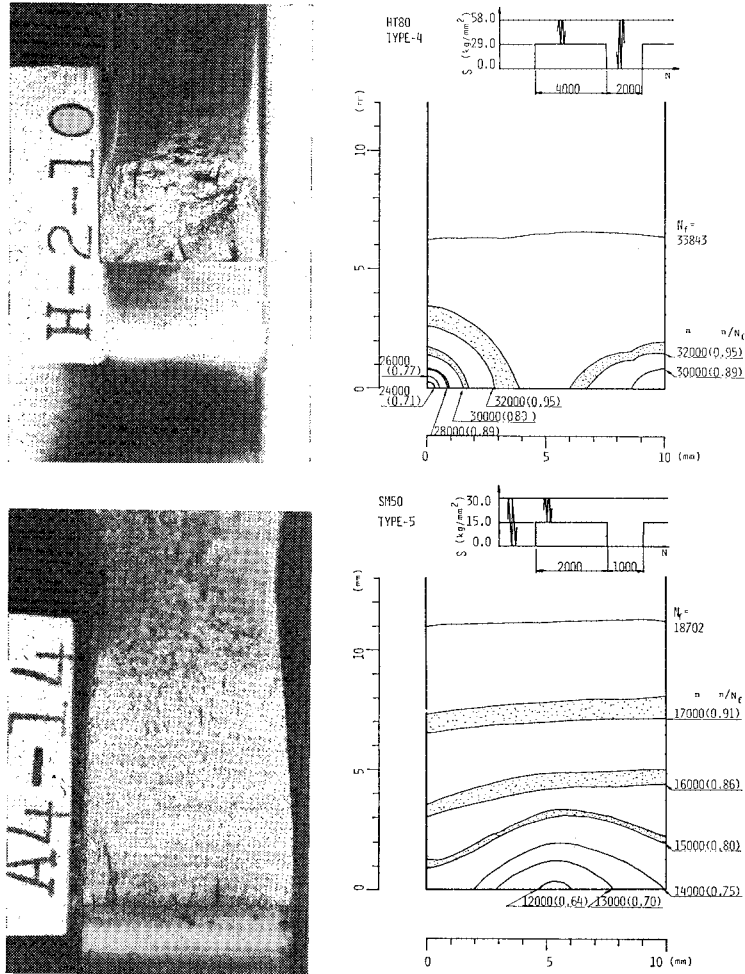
Beach Marks at Fatigue Fracture Surfaces of Notched Specimens.
